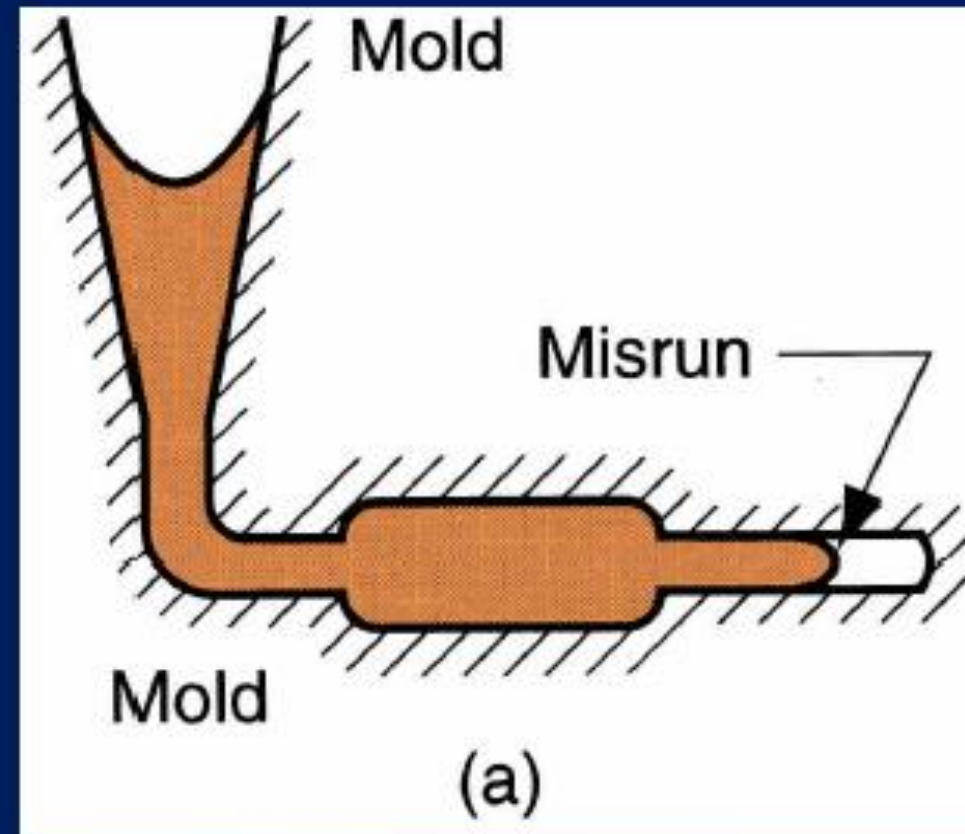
Some common defects in castings: (a) misrun
